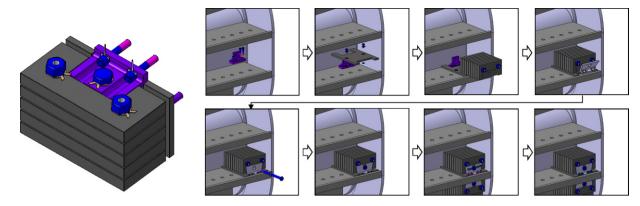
Typical IWS block and basic assembly scheme of the design-B.
